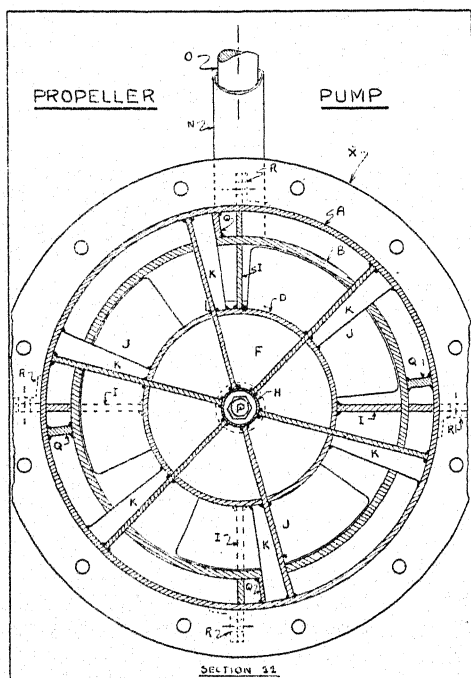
Arc welded propeller type pump—Section I-I, Fig. 1. (For legend, see page 1117).
